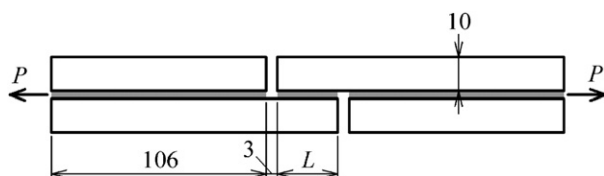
Geometry (mm) of thick-adherend shear (TAS) joints tested.
